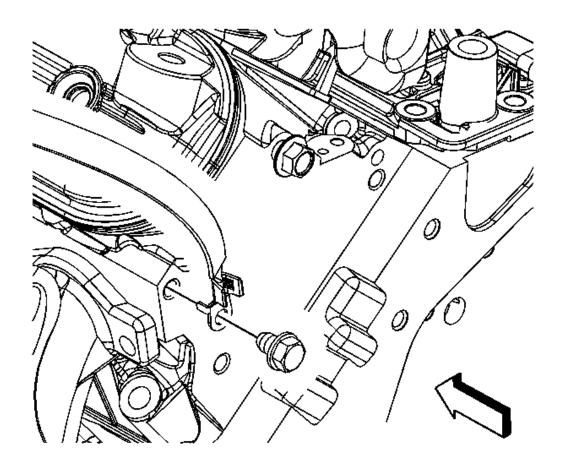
View Of Engine Ground Strap & Bolt Courtesy of GENERAL MOTORS CORP.
